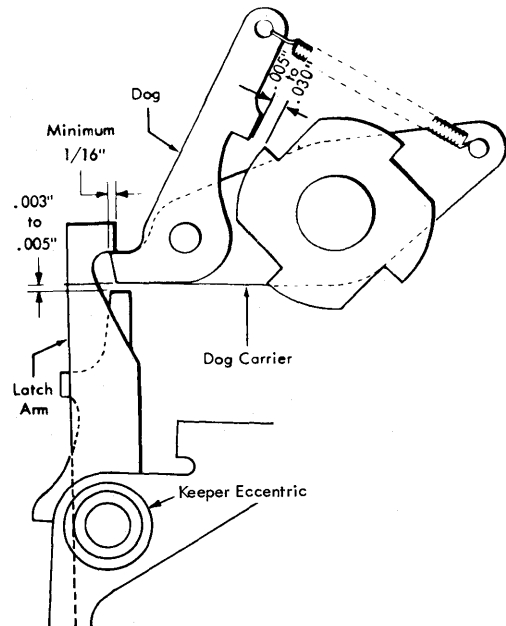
Punch Clutch Keeper to Dog Carrier Clearance
